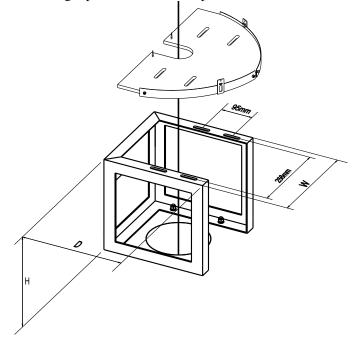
Key Dimensions of Floor Mounting Bracket
